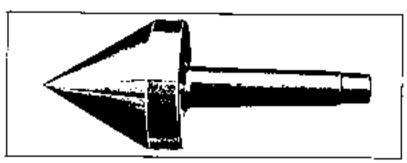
Large Mele Center head is hard, 1½" diameter with 60° included angle. Useful for turning tubing or work with holes too large to run on standard centers
